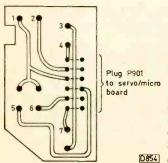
Cassette lift microswitch PCB. See text for logic conditions at the pins. The pin numbers shown relate to solder joints on the PCB and are included for identification only. The pins on plug P901 are twin terminals, shown here linked by broken lines.
